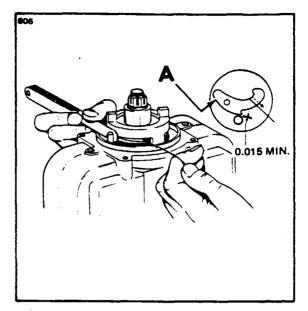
Checking Flyweight to Stop Pin Clearance
